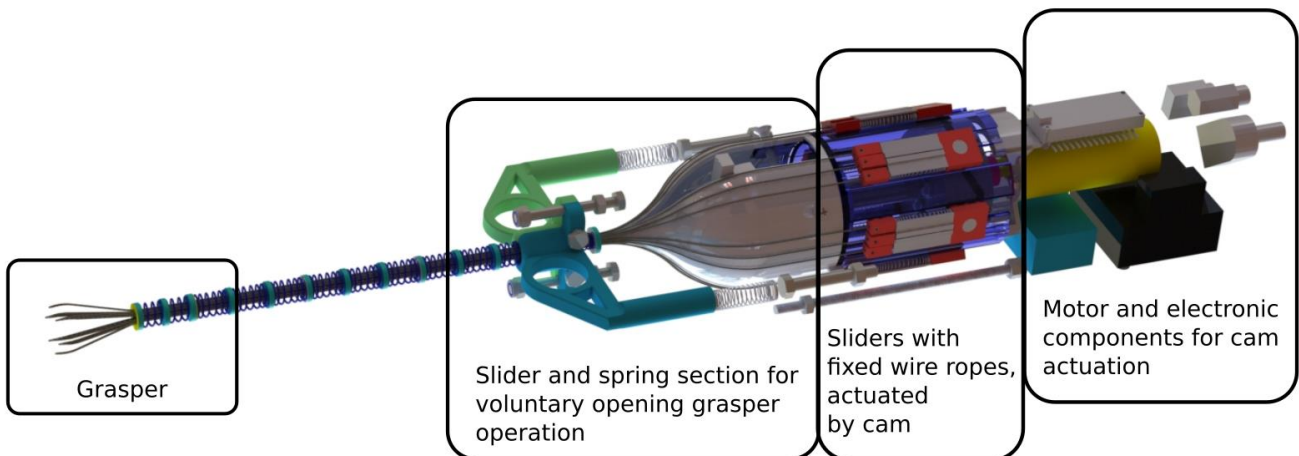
Final design with outer components removed and cam housing made see-through. The sections of the grasper, grasper operation, sliders with cam and motor section are highlighted.
